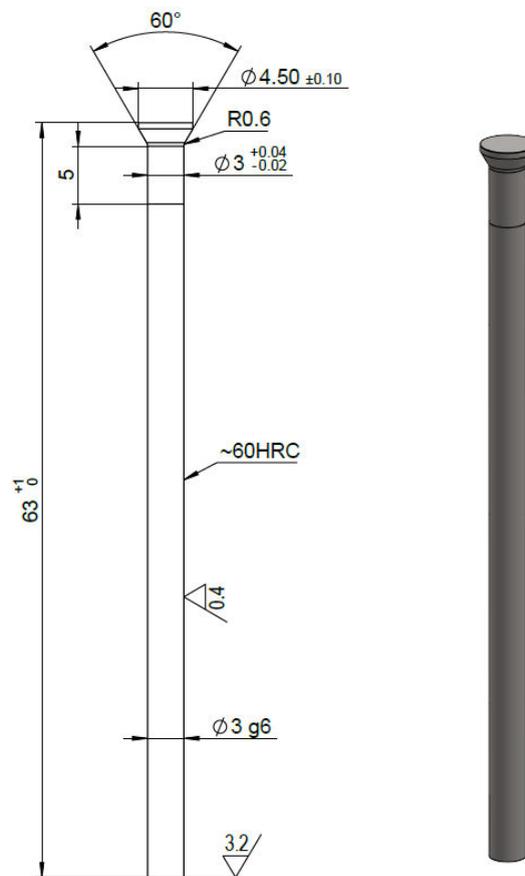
Dowel pin DP-3g6-63 dimensions
